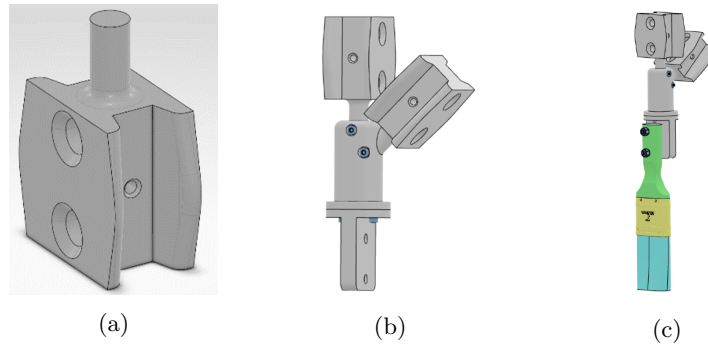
Gripper block design (a), tool interface design with a bolting feature (a) and an example of using the tool interface to make a manual brush compatible with remote handling operations (b).
